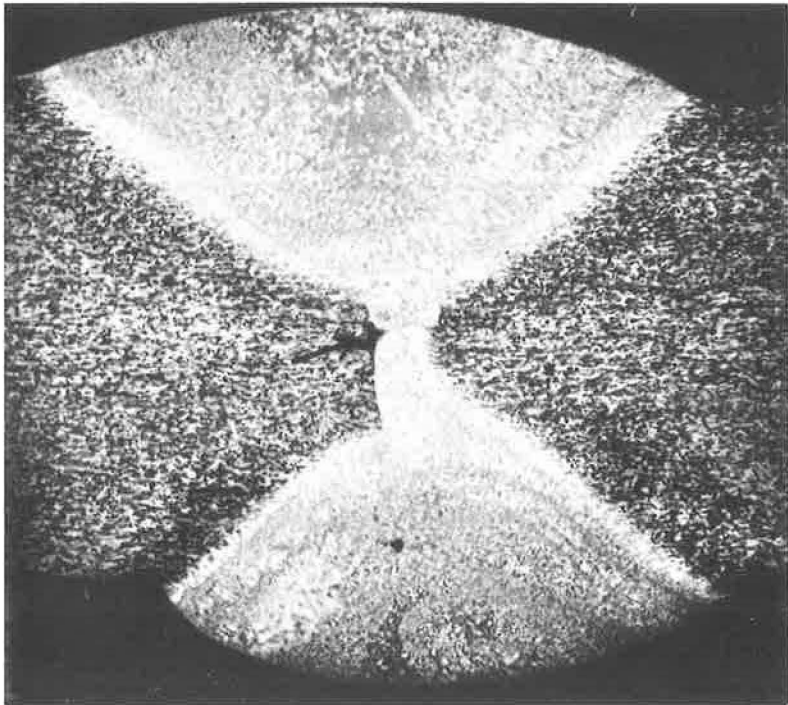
Macrograph of section through TIG weld in $\frac{1}{2}$ -in. 2219-T87 plate; arrow indicates lack of root fusion (S-278459, mag. 5X, etch Keller's).
